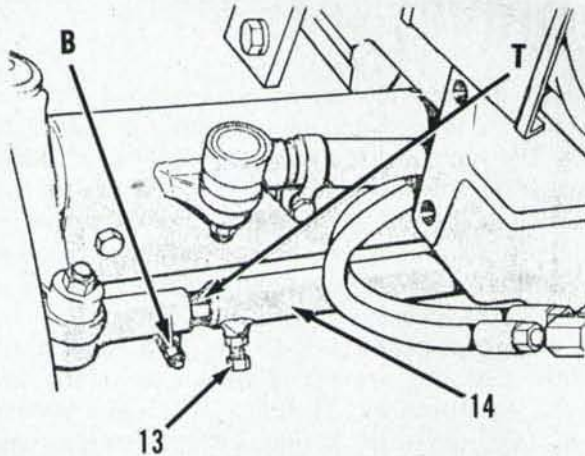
View of track and toe-in adjusting points for two-wheel-drive models. Hydrostatic steering model is shown, but adjustment is similar for models with manual or power steering.
